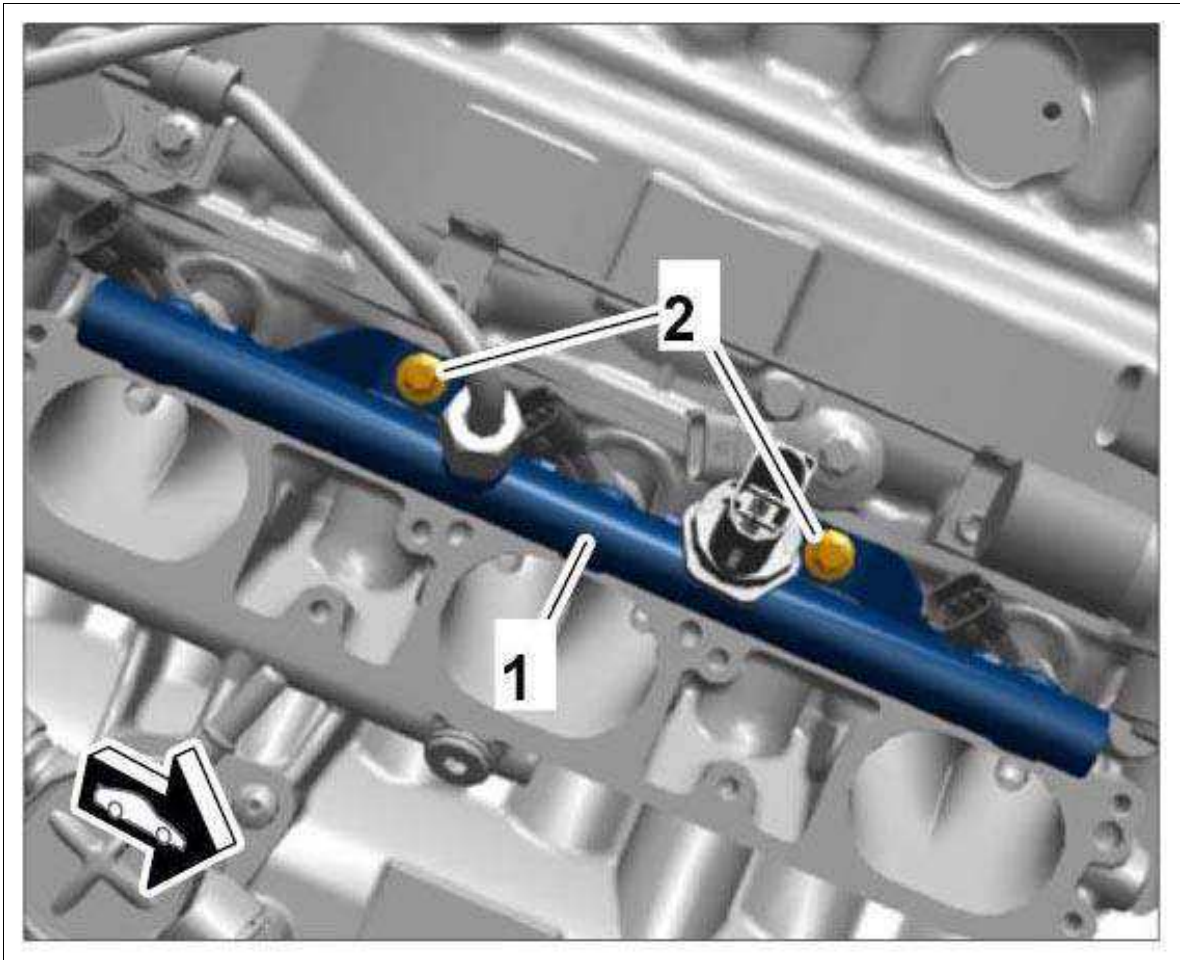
Identifying Cable Plugs In Fuel Collection Pipe Area
